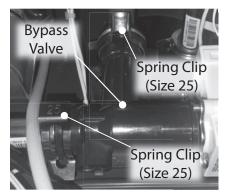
Spring Clips (Size 25), Bypass Valve (B2)
